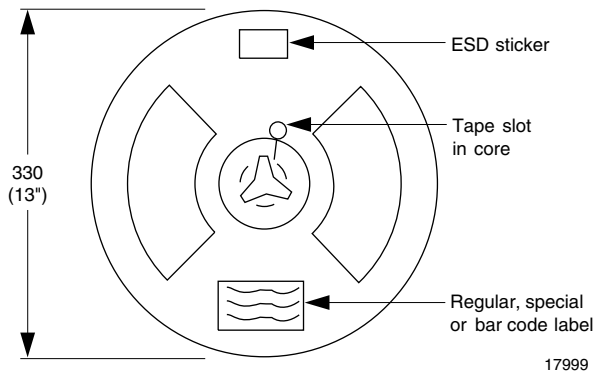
Tape and Reel Shipping Medium (EIA-481, revision A, and IEC 60286), 2000 Units per Reel
